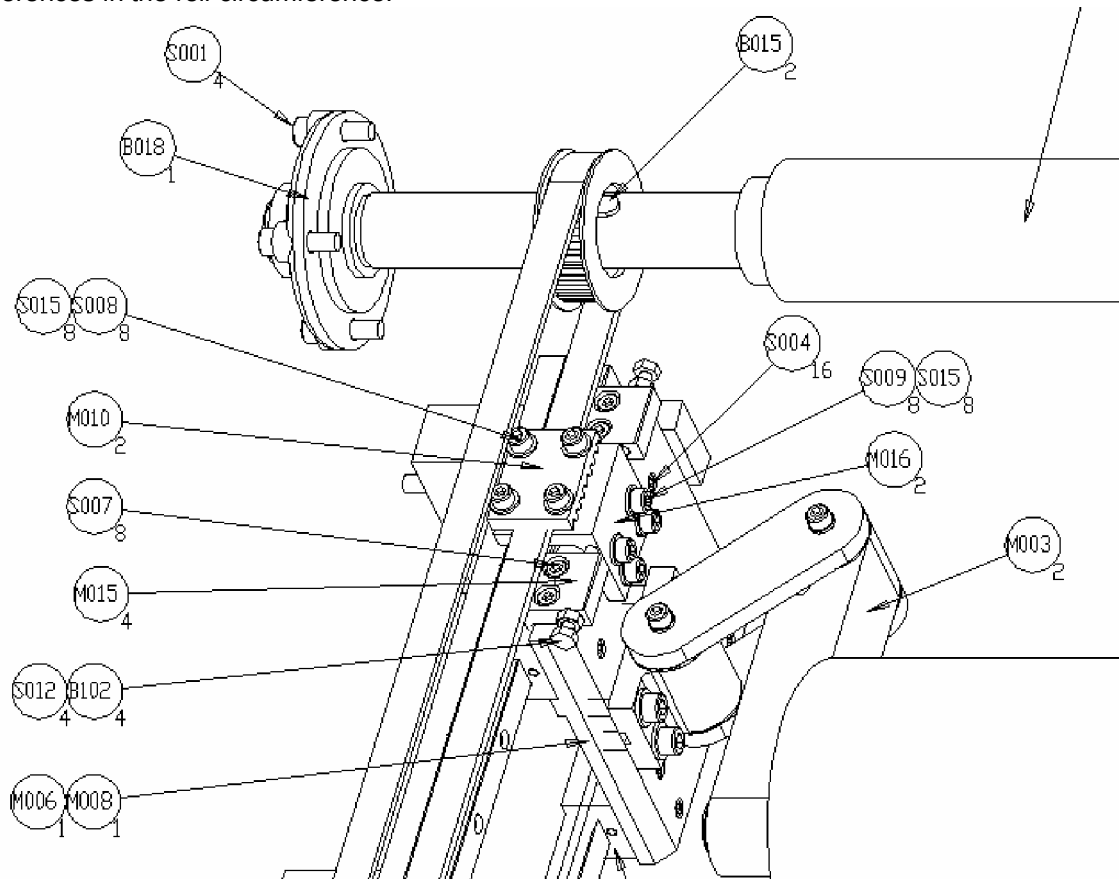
1 Drawing of Unwind Layarm Pivot assembly Roller Alignment
